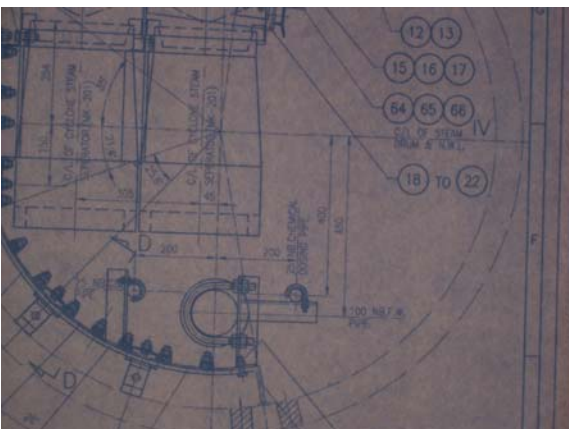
Right way to locate the FW piping, HP dosing pipe & CBD pipe
